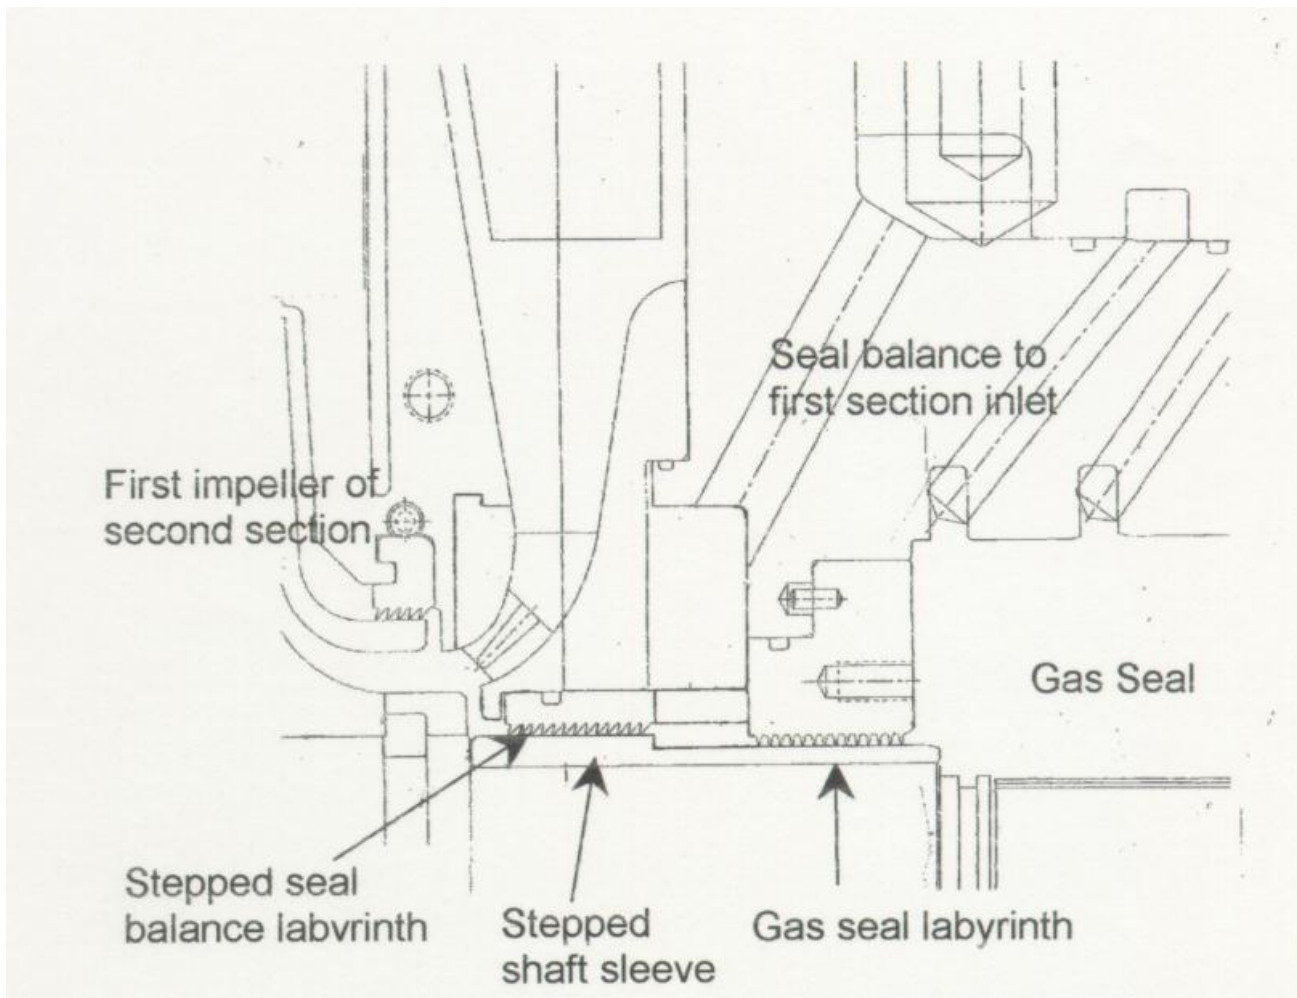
Back-to-Back Compressor Seal Cavity (Revised Design)
